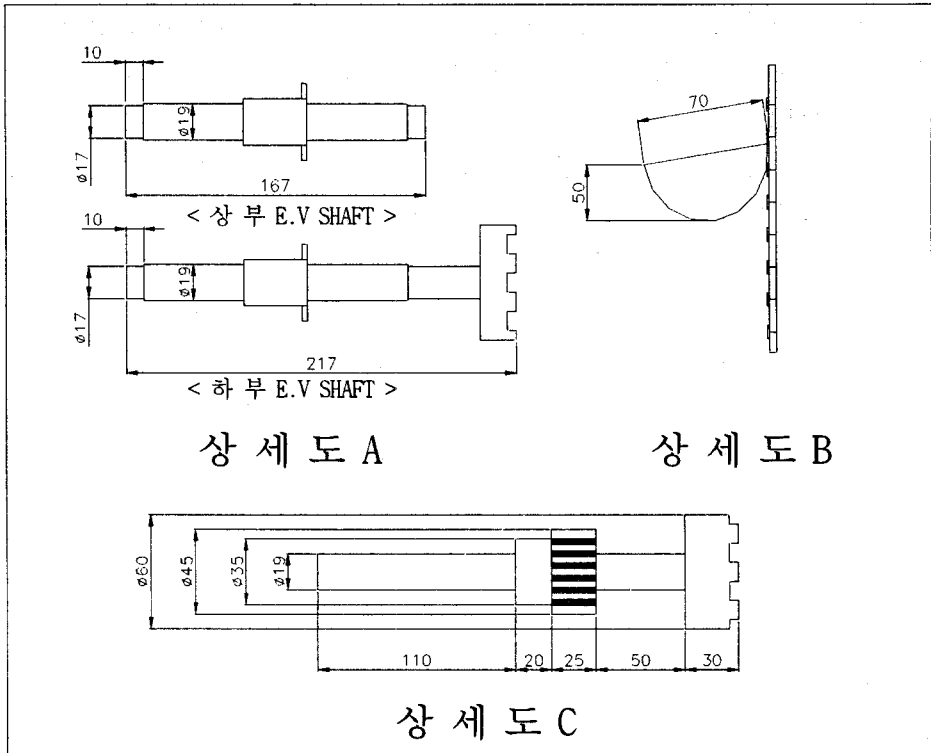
Detail drawings of bucket elevator in developed garlic separator.
